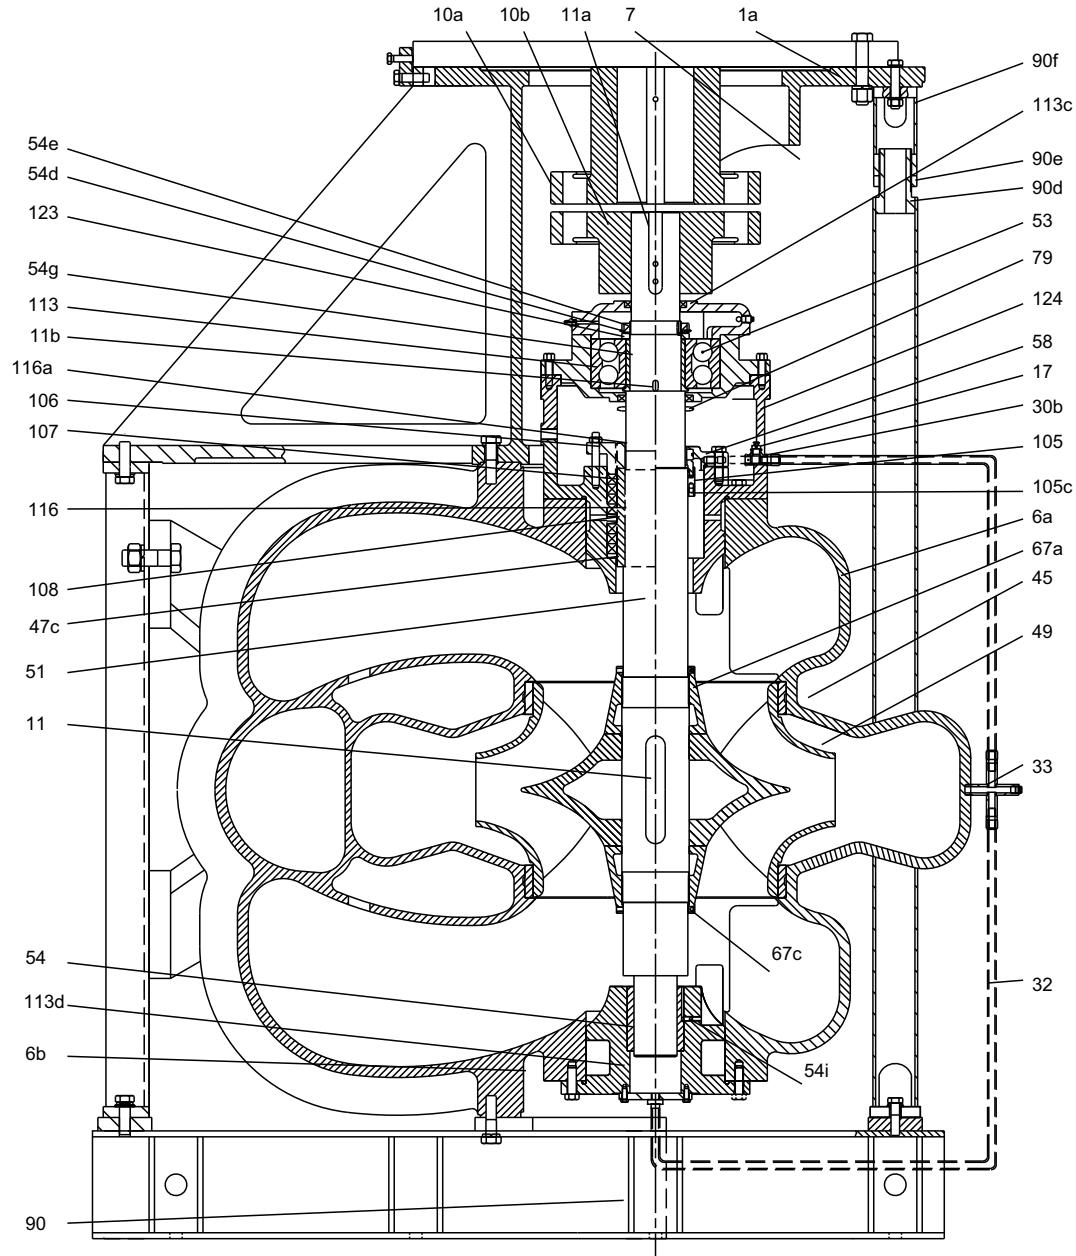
Sectional drawing, standard construction type 6, motor frame size is up to 250
